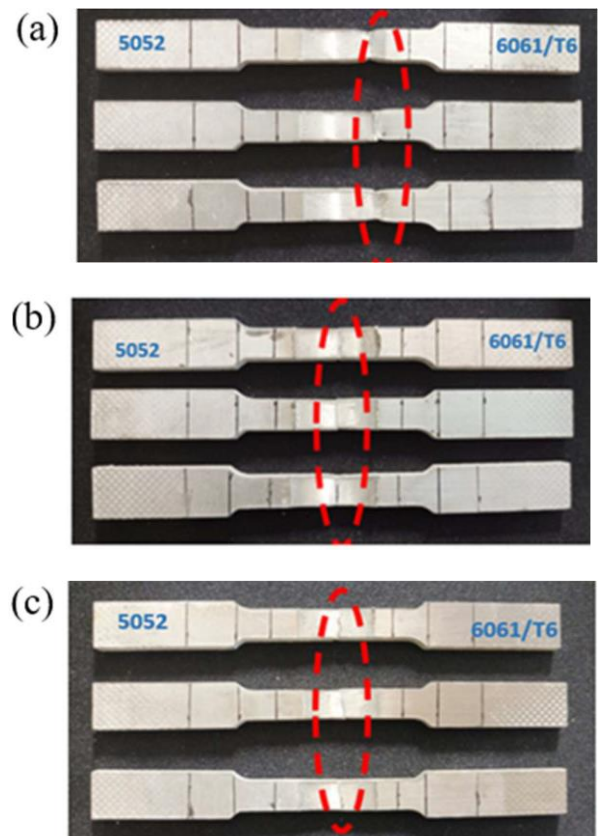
Fracture location of tensile strength specimen : (a) As welded, (b) 5M8H, (c) 60M8H
